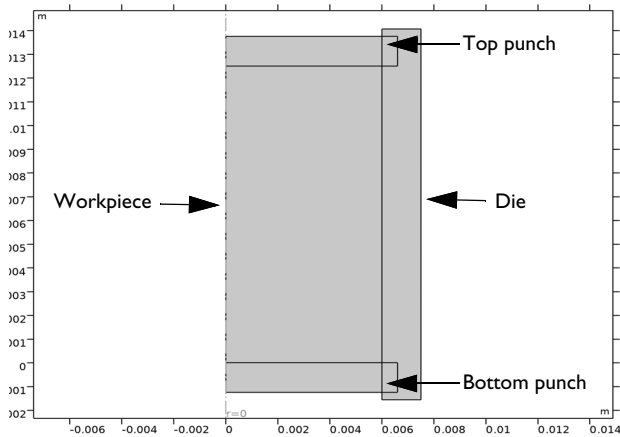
Geometry of the workpiece (pharmaceutical powder), punches, and die.
